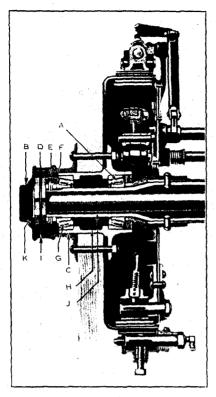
Sectional View of Rear Hub, Showing Bearings
